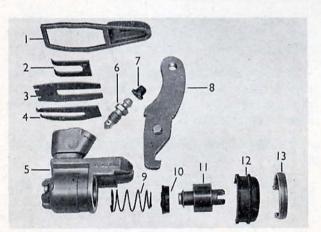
Rear brake cylinder and attaching partsexploded view
